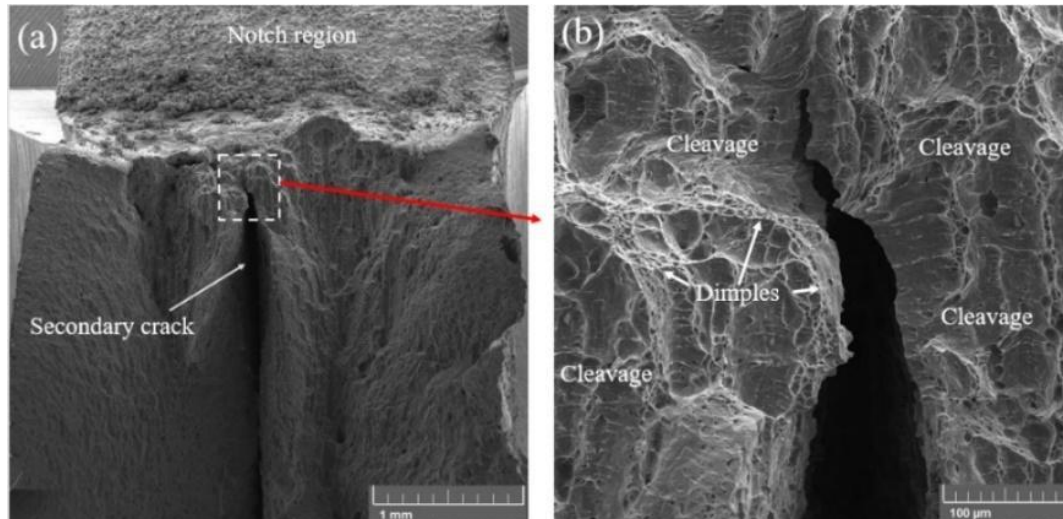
Charpy impact test fracture in the base metal (SEM)
